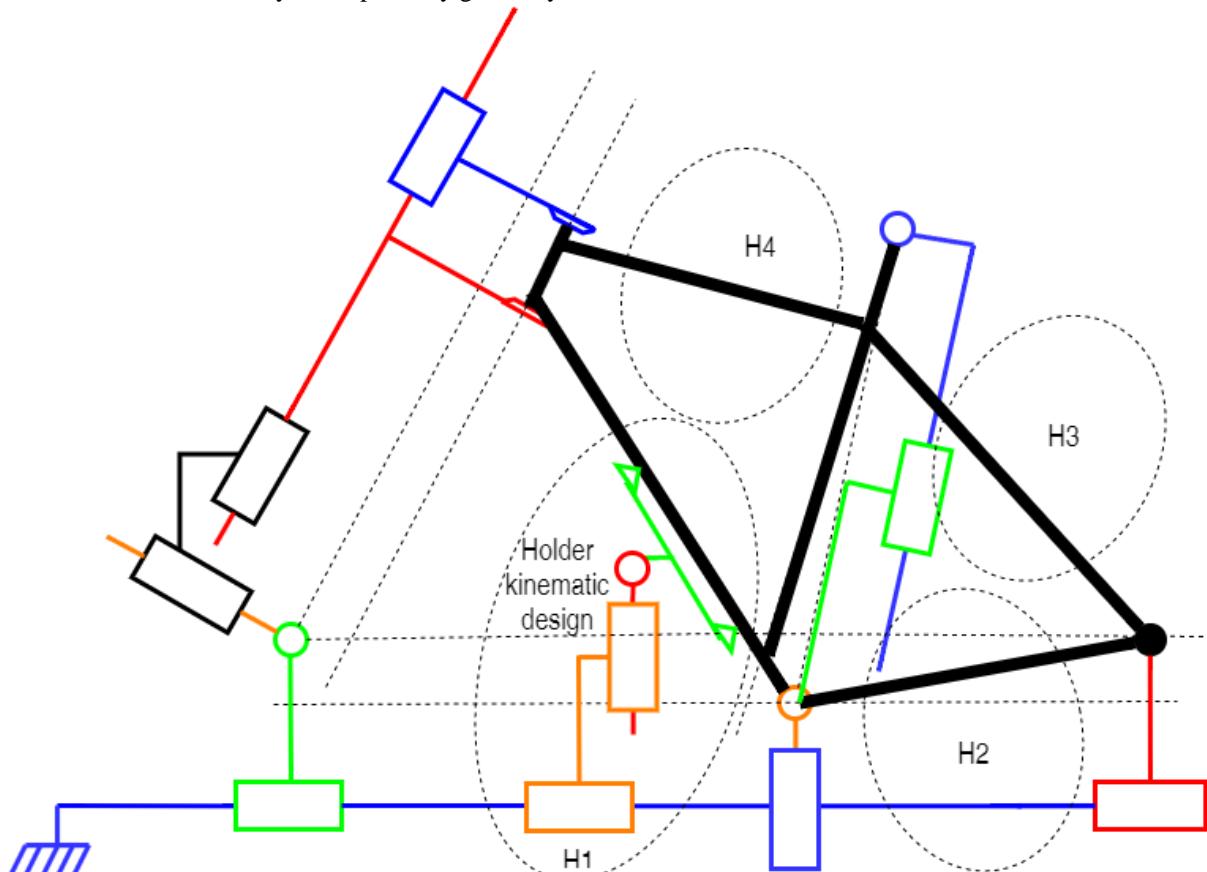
Kinematic diagram of the new welding-jig with tube holders
